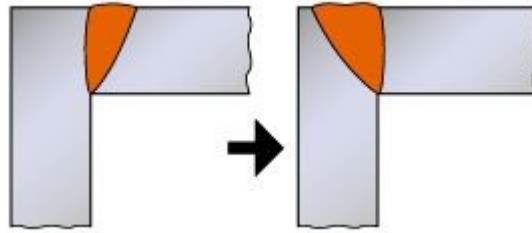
the fusion boundary is more normal to the susceptible plate surface will be particularly effective in reducing the risk. (The welding institute 2010.)
